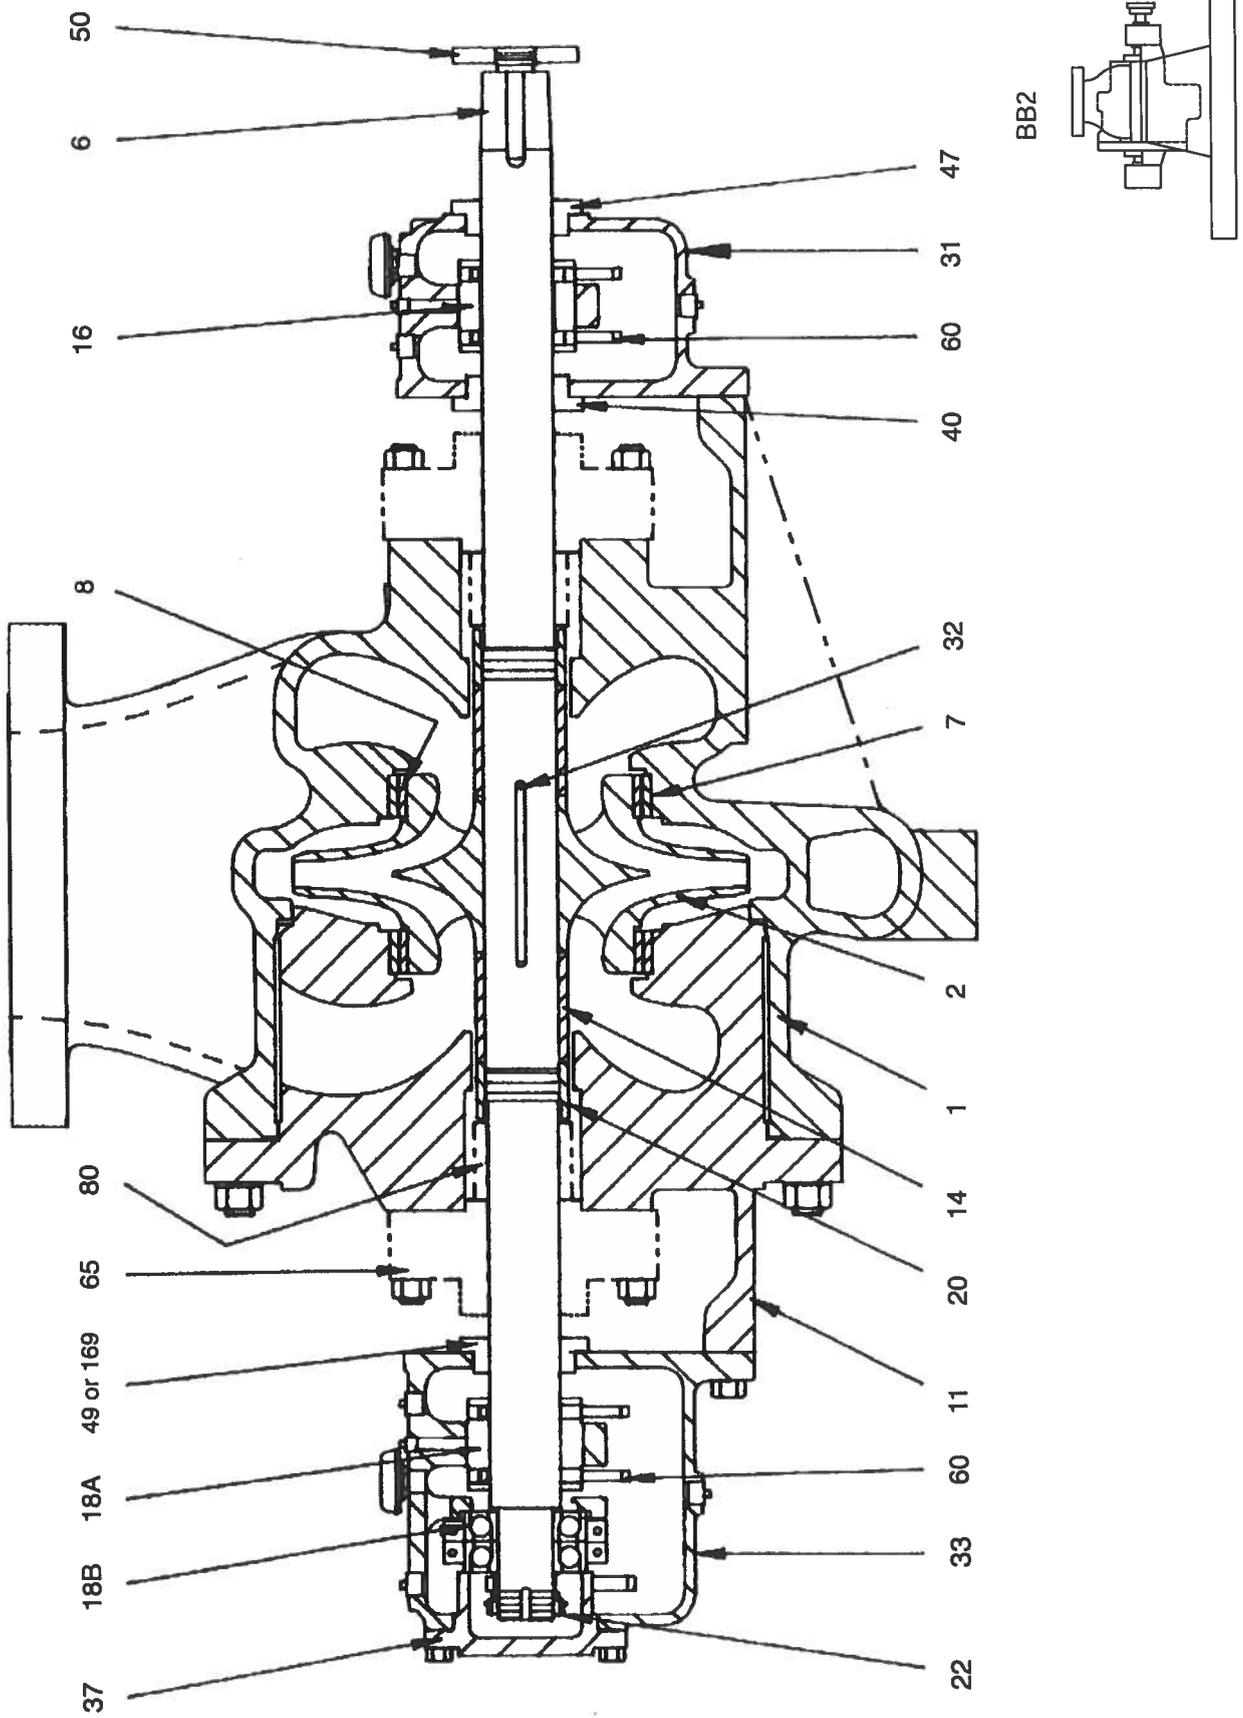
Impeller between bearings — flexibly coupled — single stage — radial split case
